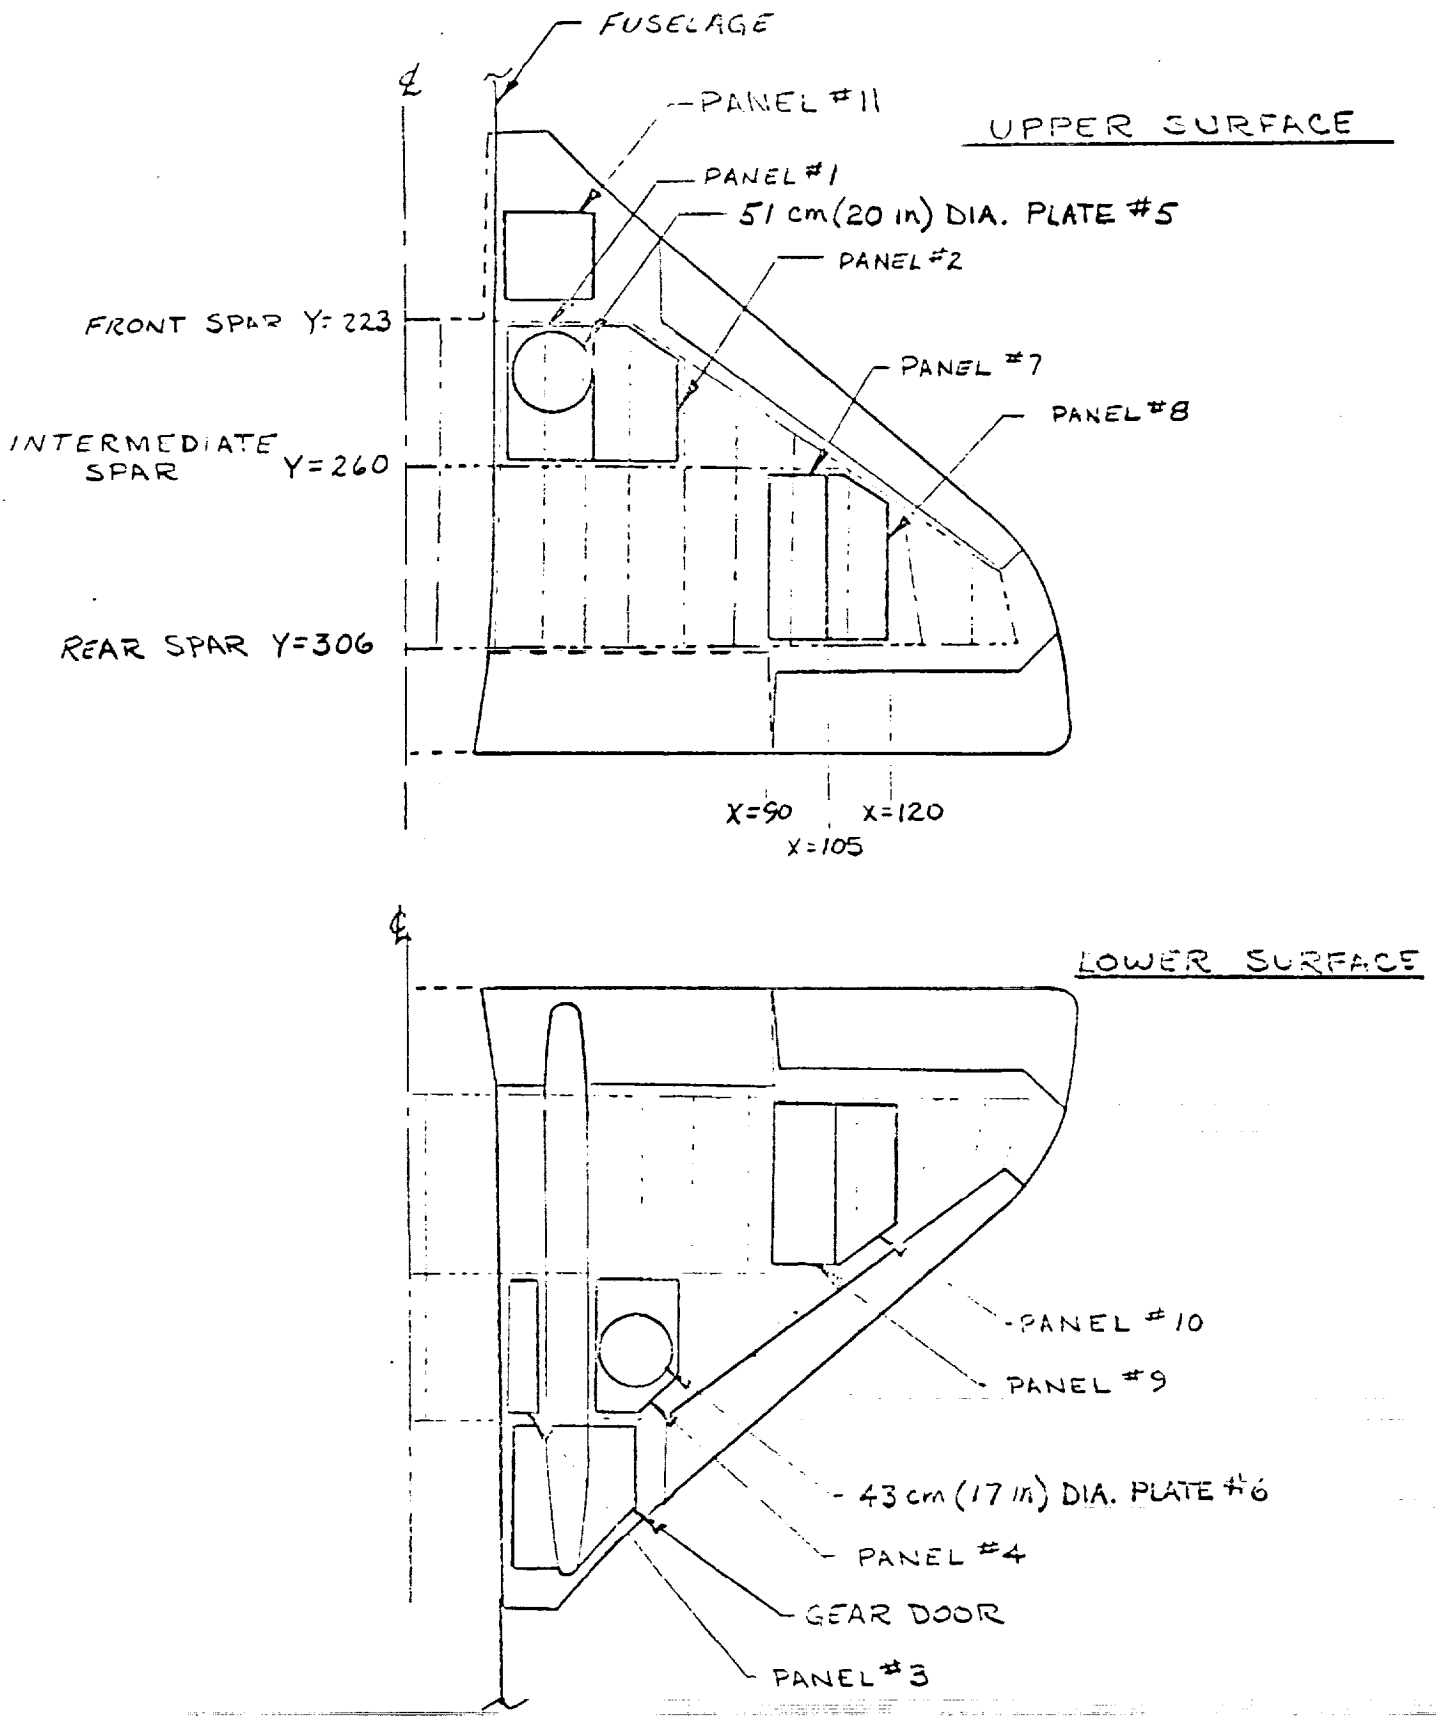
UNDAMAGED WING - ALL PANELS IN PLACE
